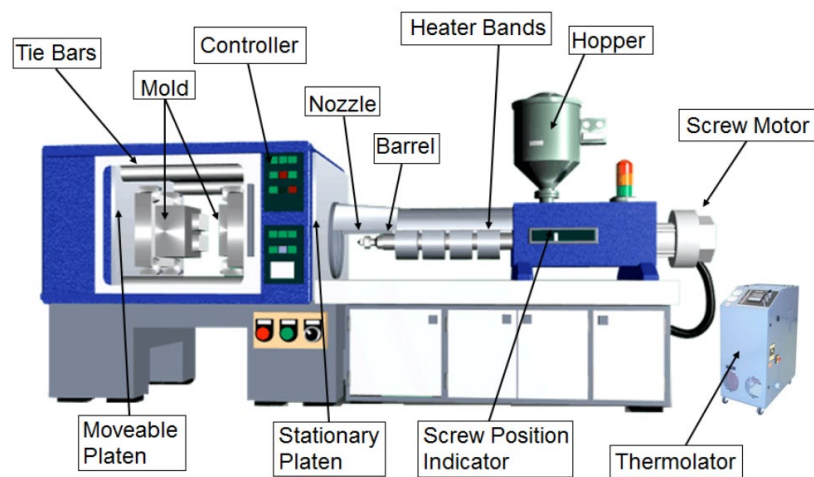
Basic structure of injection molding machine (Beaumont, 2019).
